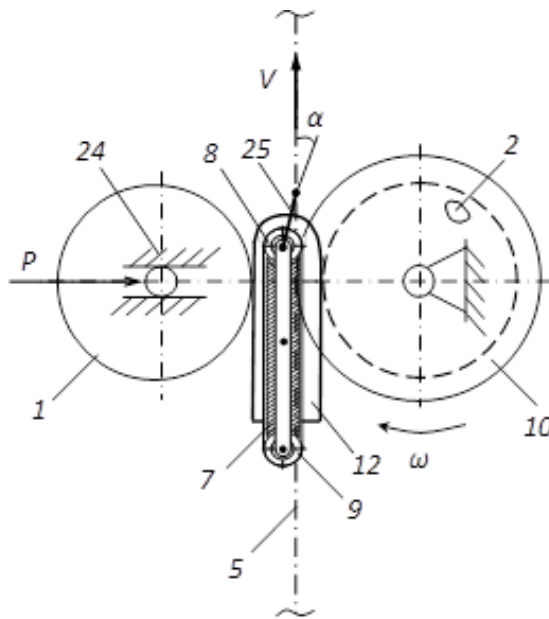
Displacement of the base plate from the conveyor chain at an angle (α) depending on the variable thickness of the sheet material 1, 2 – working rollers, 5 – conveyor chain, 7 – base plate, 8 – upper roller, 9 – lower roller, 10 – sprocket, 12 – sheet material, 25 – crankshaft
